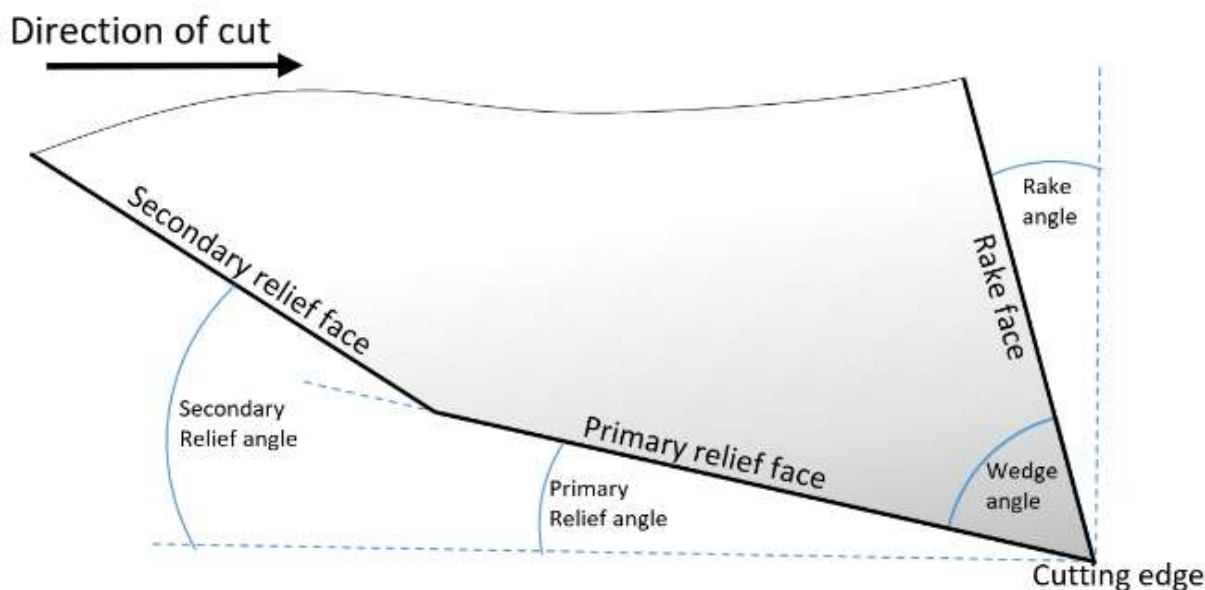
Cutting Edge Geometry and the Tool Faces
